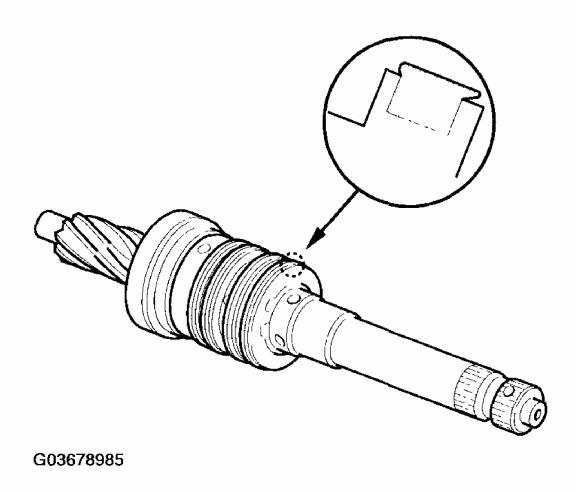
Identifying Sleeve Edges Of Grooves Courtesy of AMERICAN HONDA MOTOR CO., INC.
